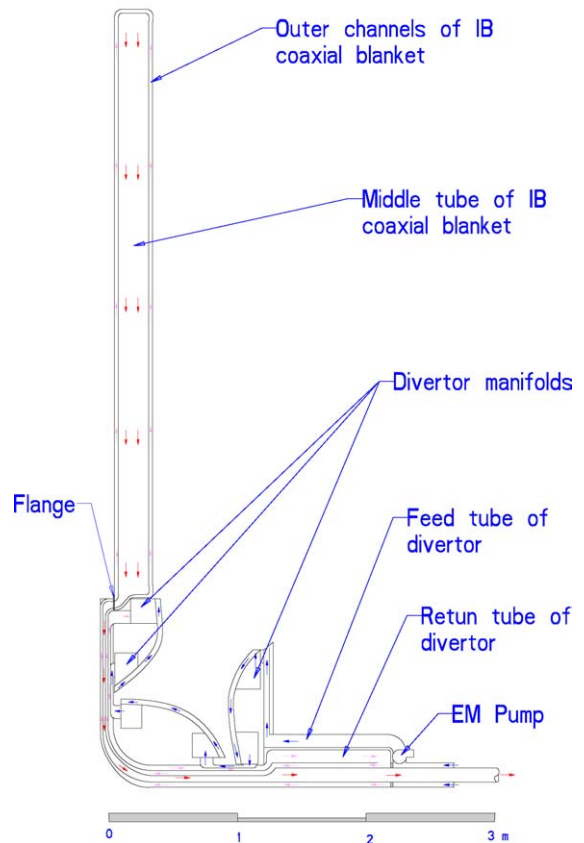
Circuit 1—lower divertor + IB Blanket.
